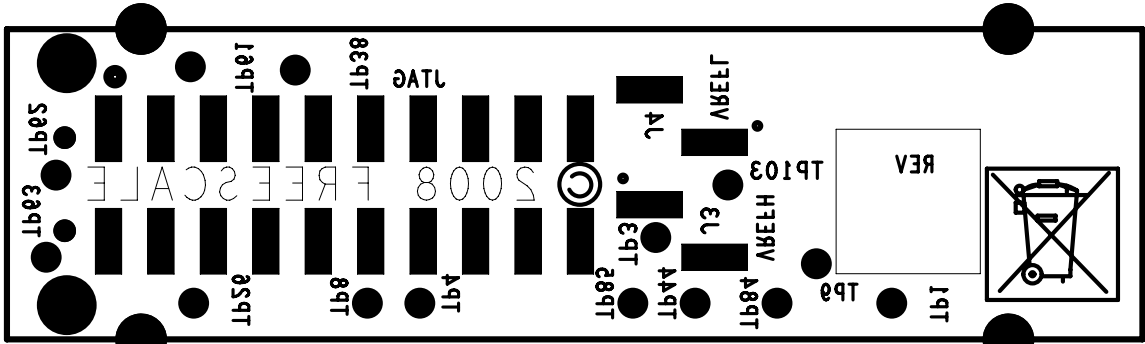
1322x USB Dongle PCB Test Points (Bottom View)
